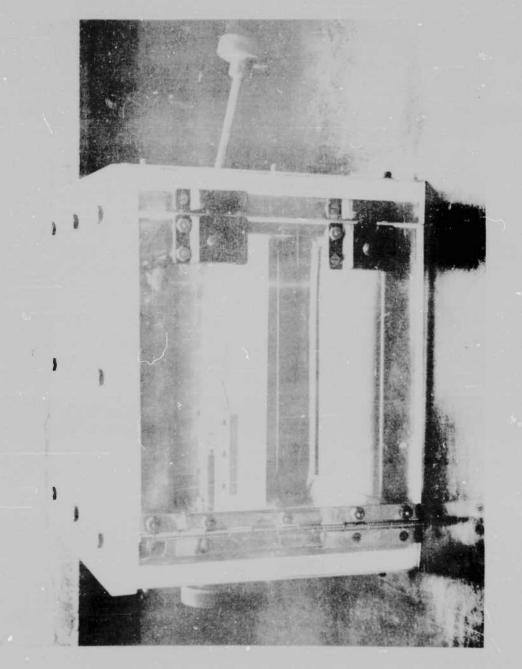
Fixture used for disassembling brass cover from die cup used in Picationy Arsenal impact test
